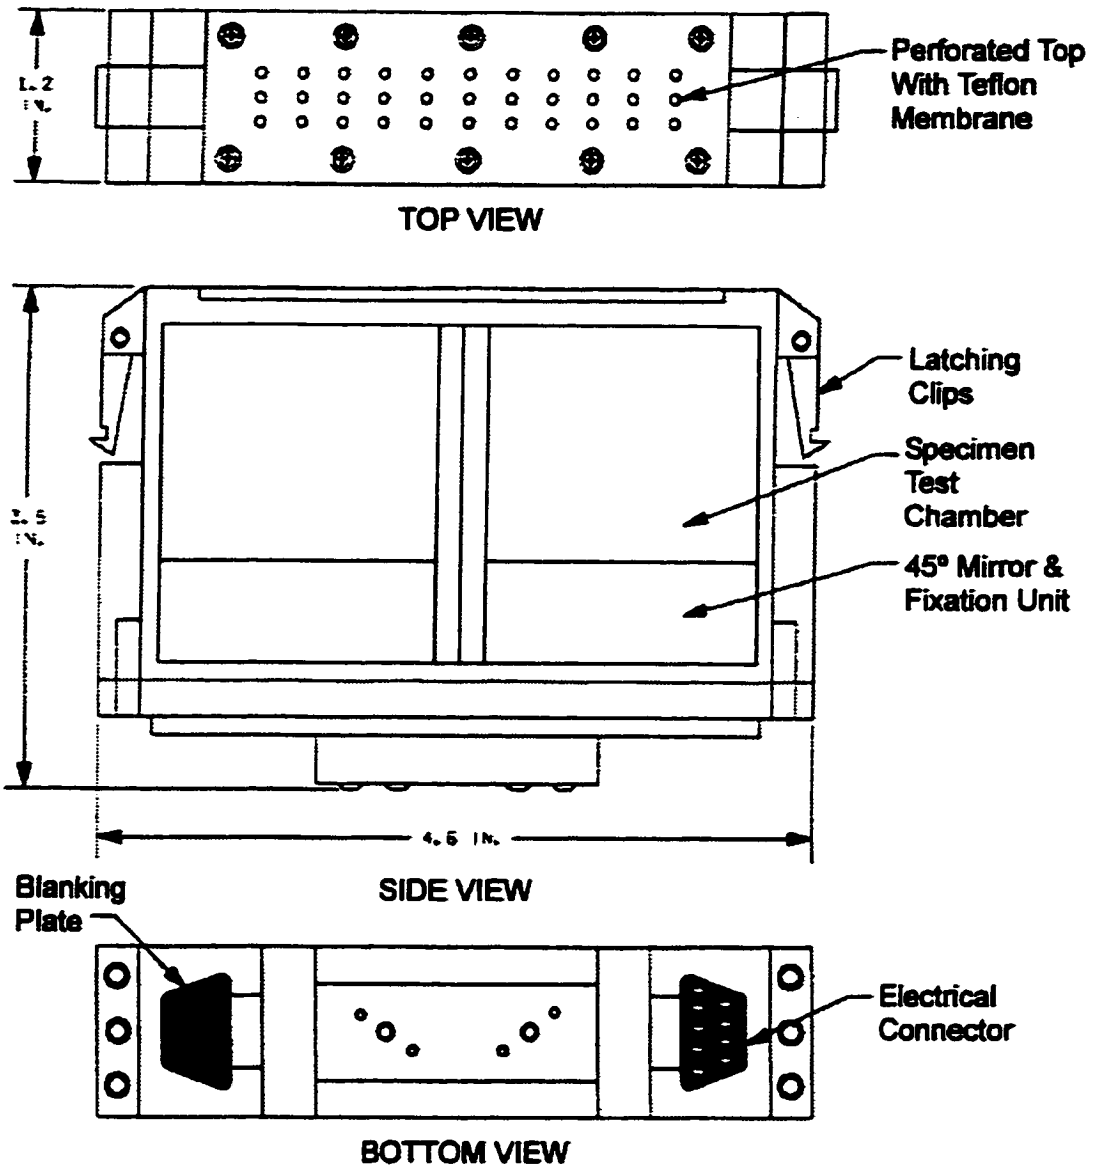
Diagram of a fully assembled Specimen Container Unit (SCU)
